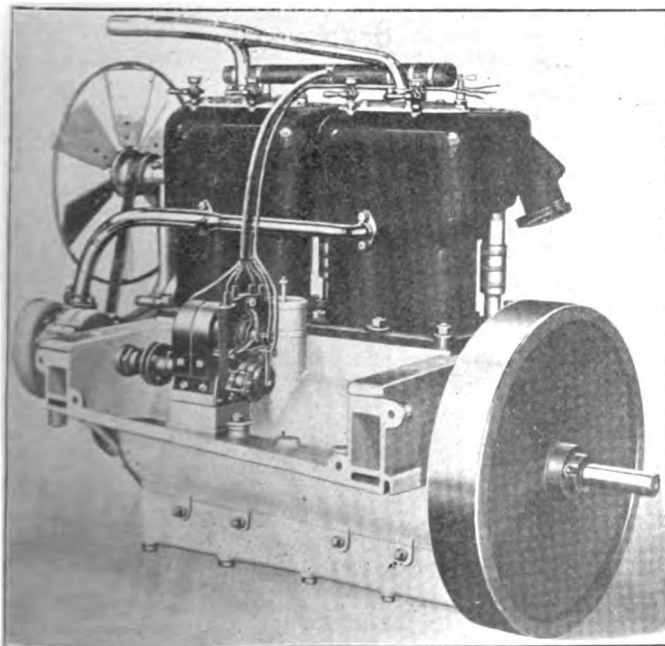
Left side of the motor presenting details of the magneto mounting, method of wiring, and shape of the motor case
